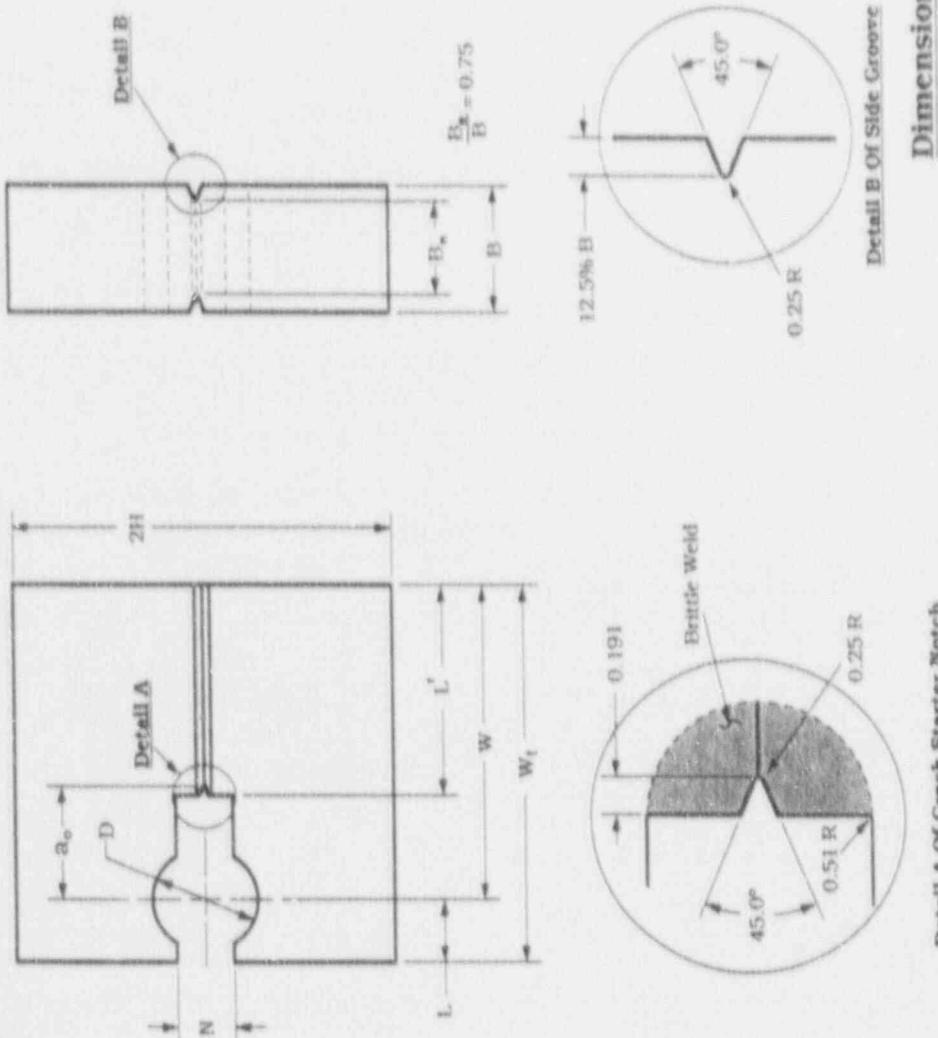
Nominal dimensions in millimeters of weld-embrittled crack-arrest specimens used in the Sixth Irradiation Series.
